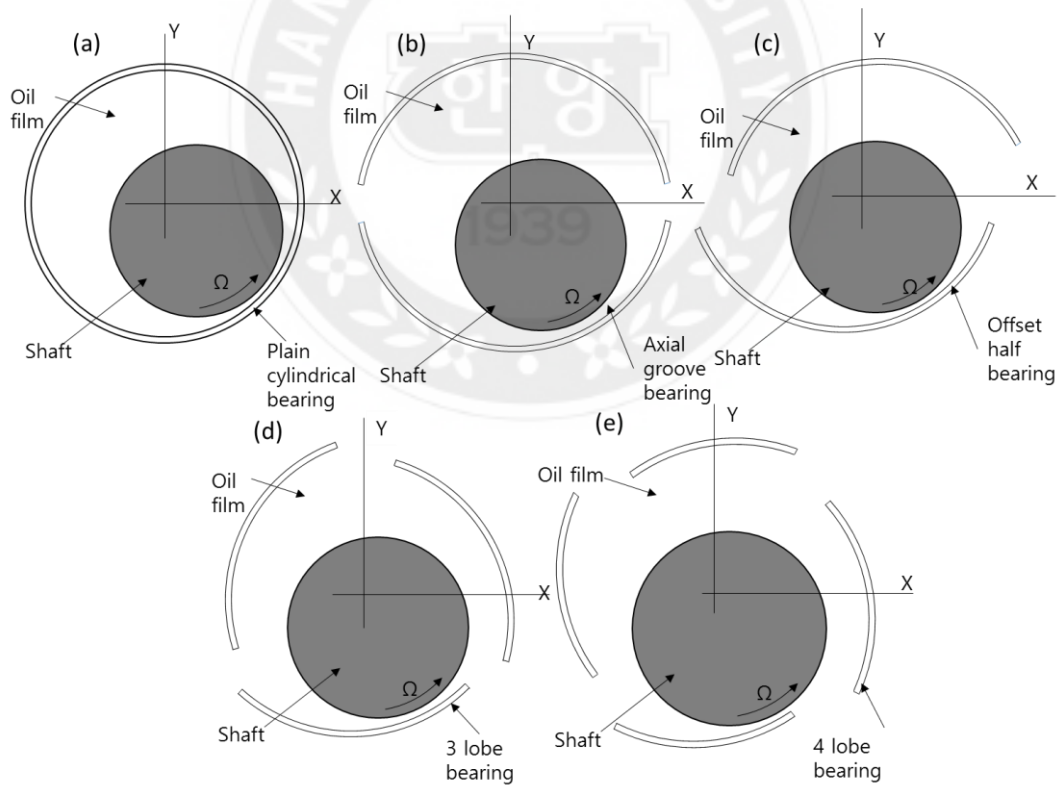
Schematic view of (a) plain cylindrical bearing, (b) axial groove bearing, (c) offset half bearing, (d) 3 lobe bearing, and (e) 4 lobe bearing
